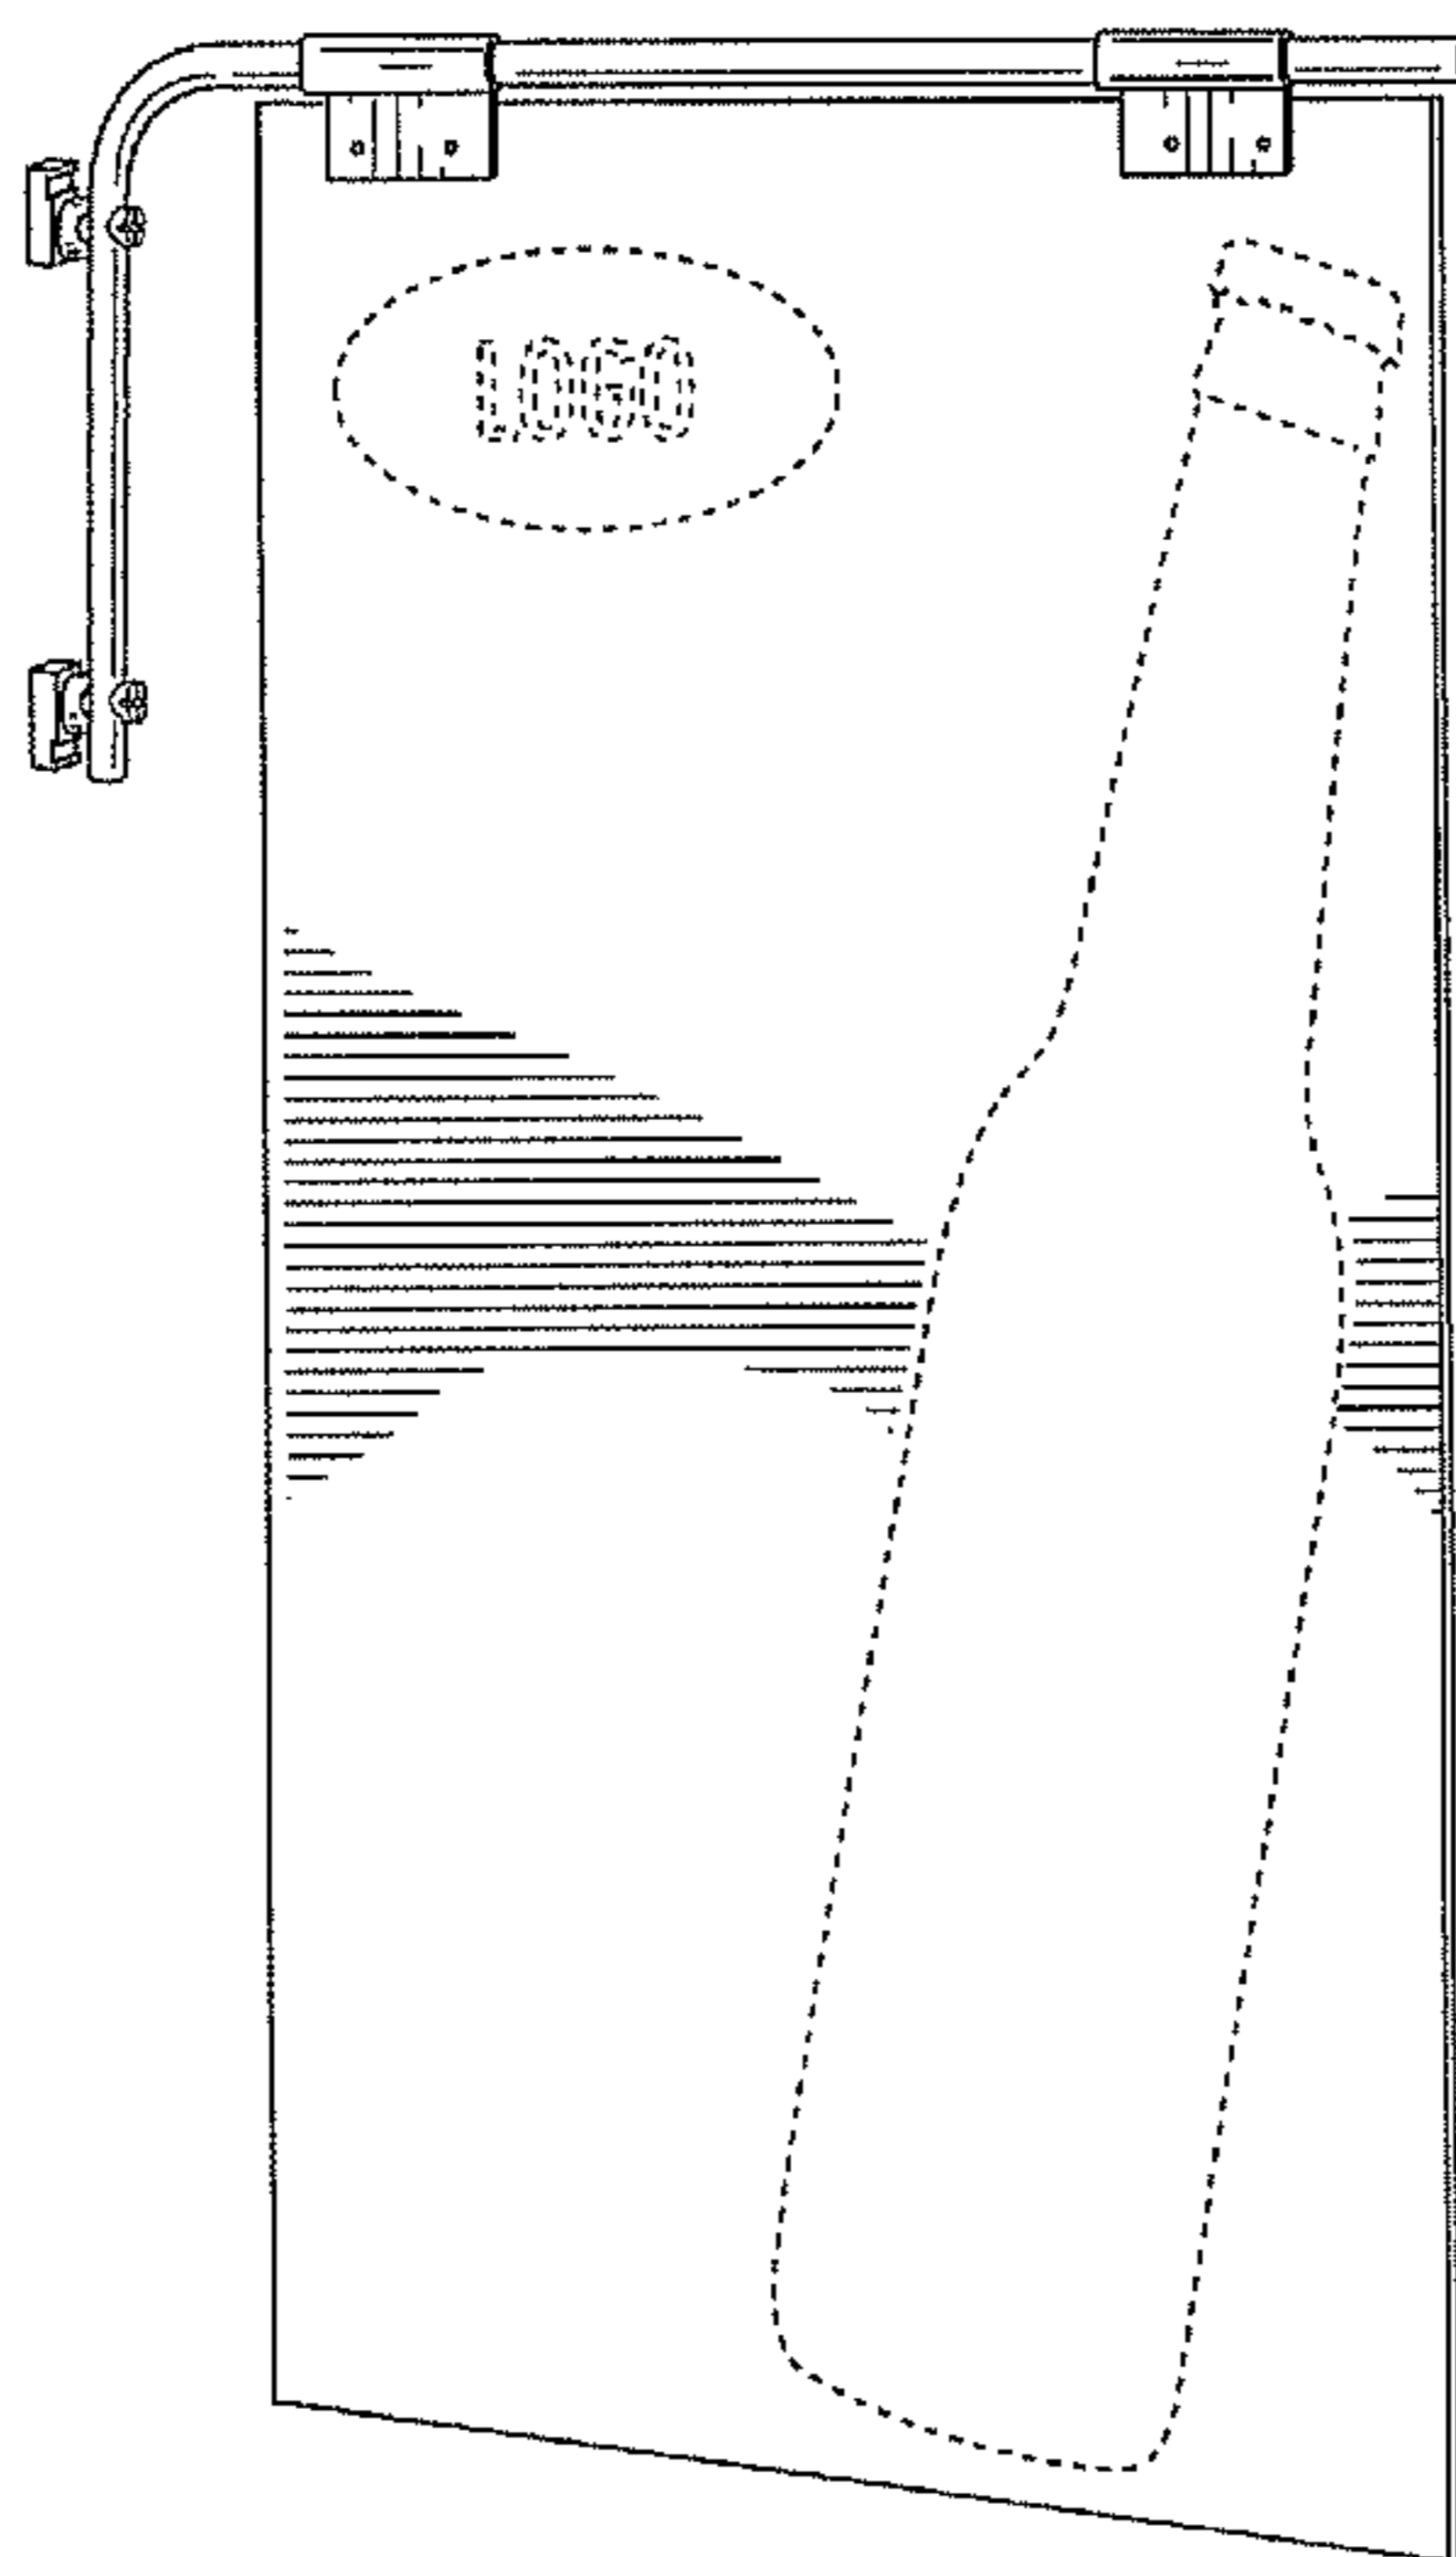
is a front view of the spinning sign assembly of FIG. 1;
